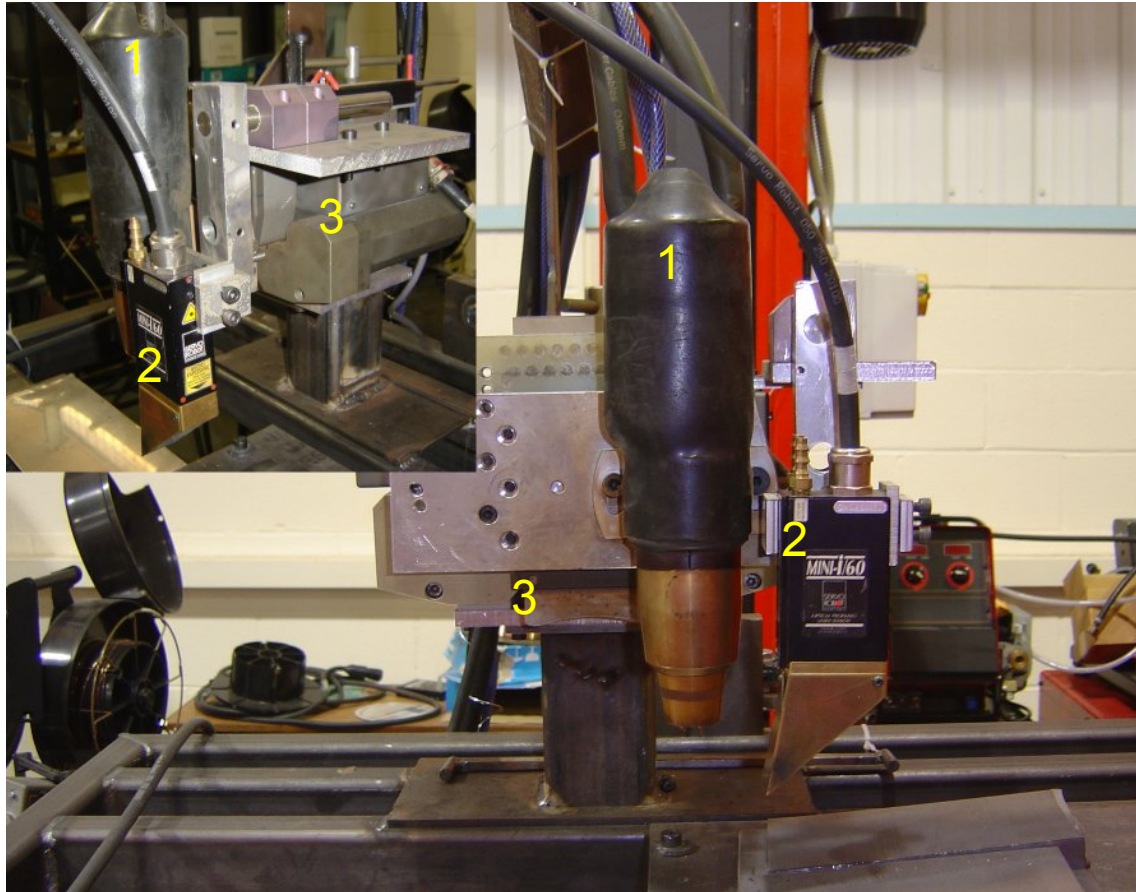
Laser vision sensor attached to the welding head.
